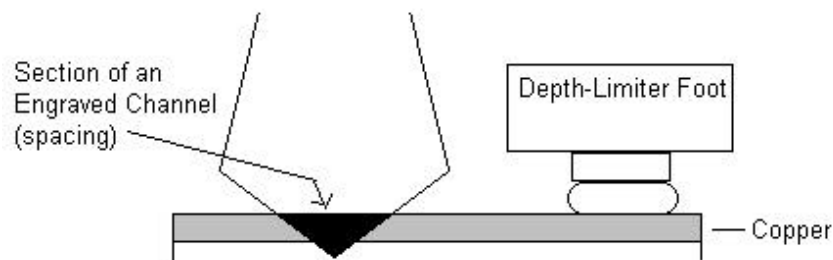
Enlarged view of mill bit showing depth of engraving channel.
